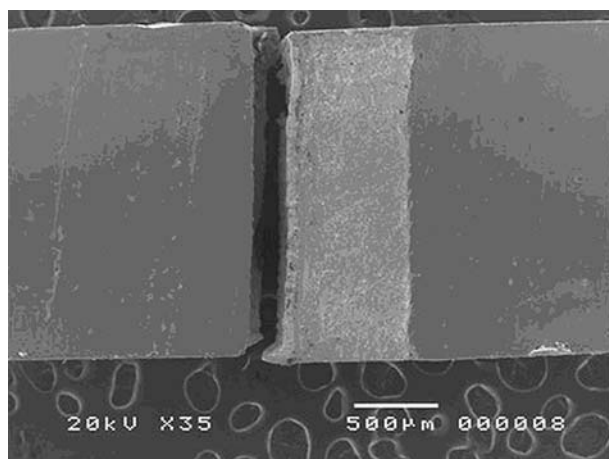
Fracture path of Sn-37Pb/Ni-P solder joint aged at 170°C for 400 h.
